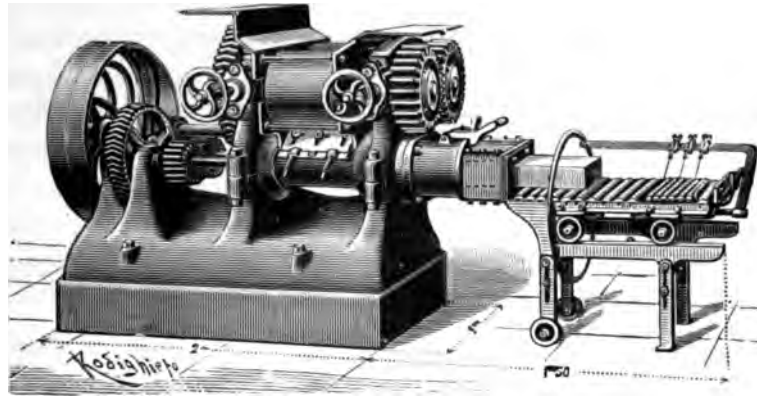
Screw Machine with two Distributing Cylinders (Boulet).
